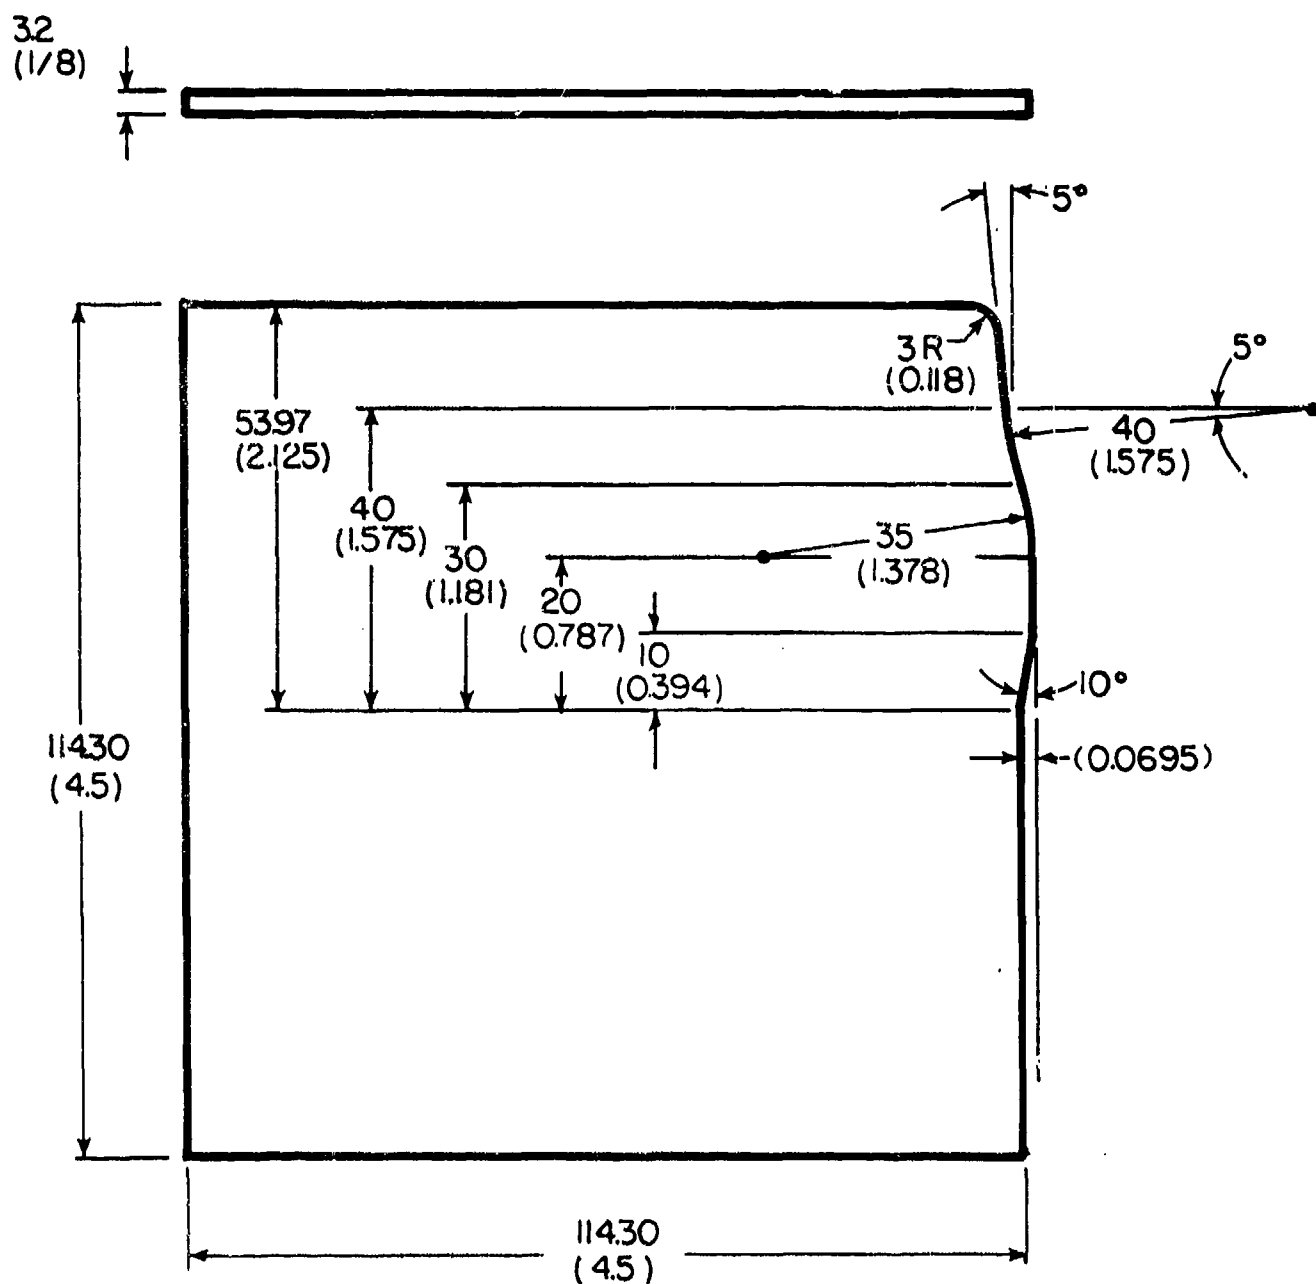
Sketch of template for cold drawing with double curvature die (first stage, final double draw).
